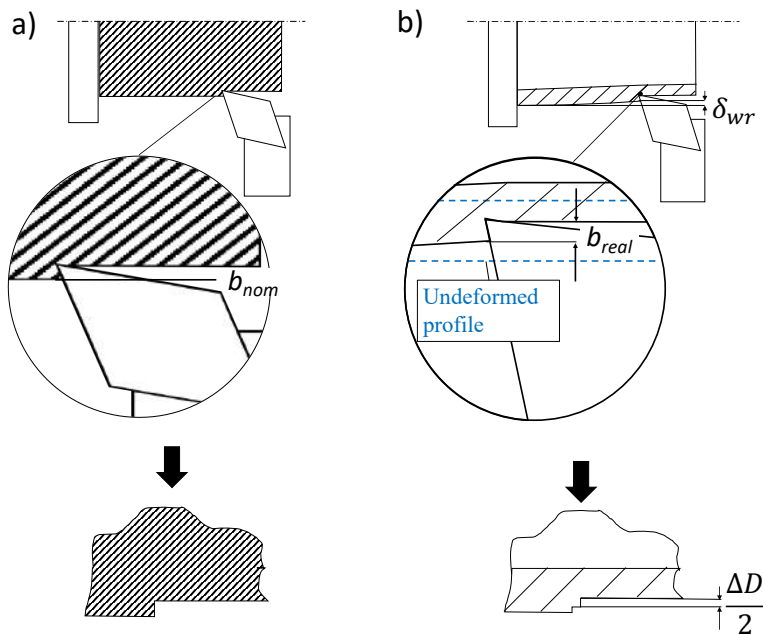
a) Rigid workpiece case b) Compliant workpiece case and geometrical error source
